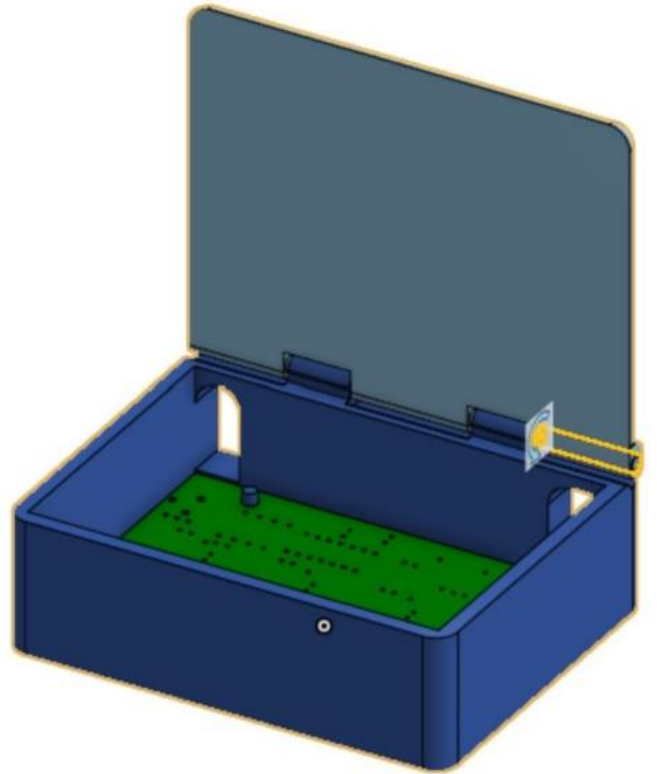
CAD model assembly of housing for Tri- Oscillator PCB
